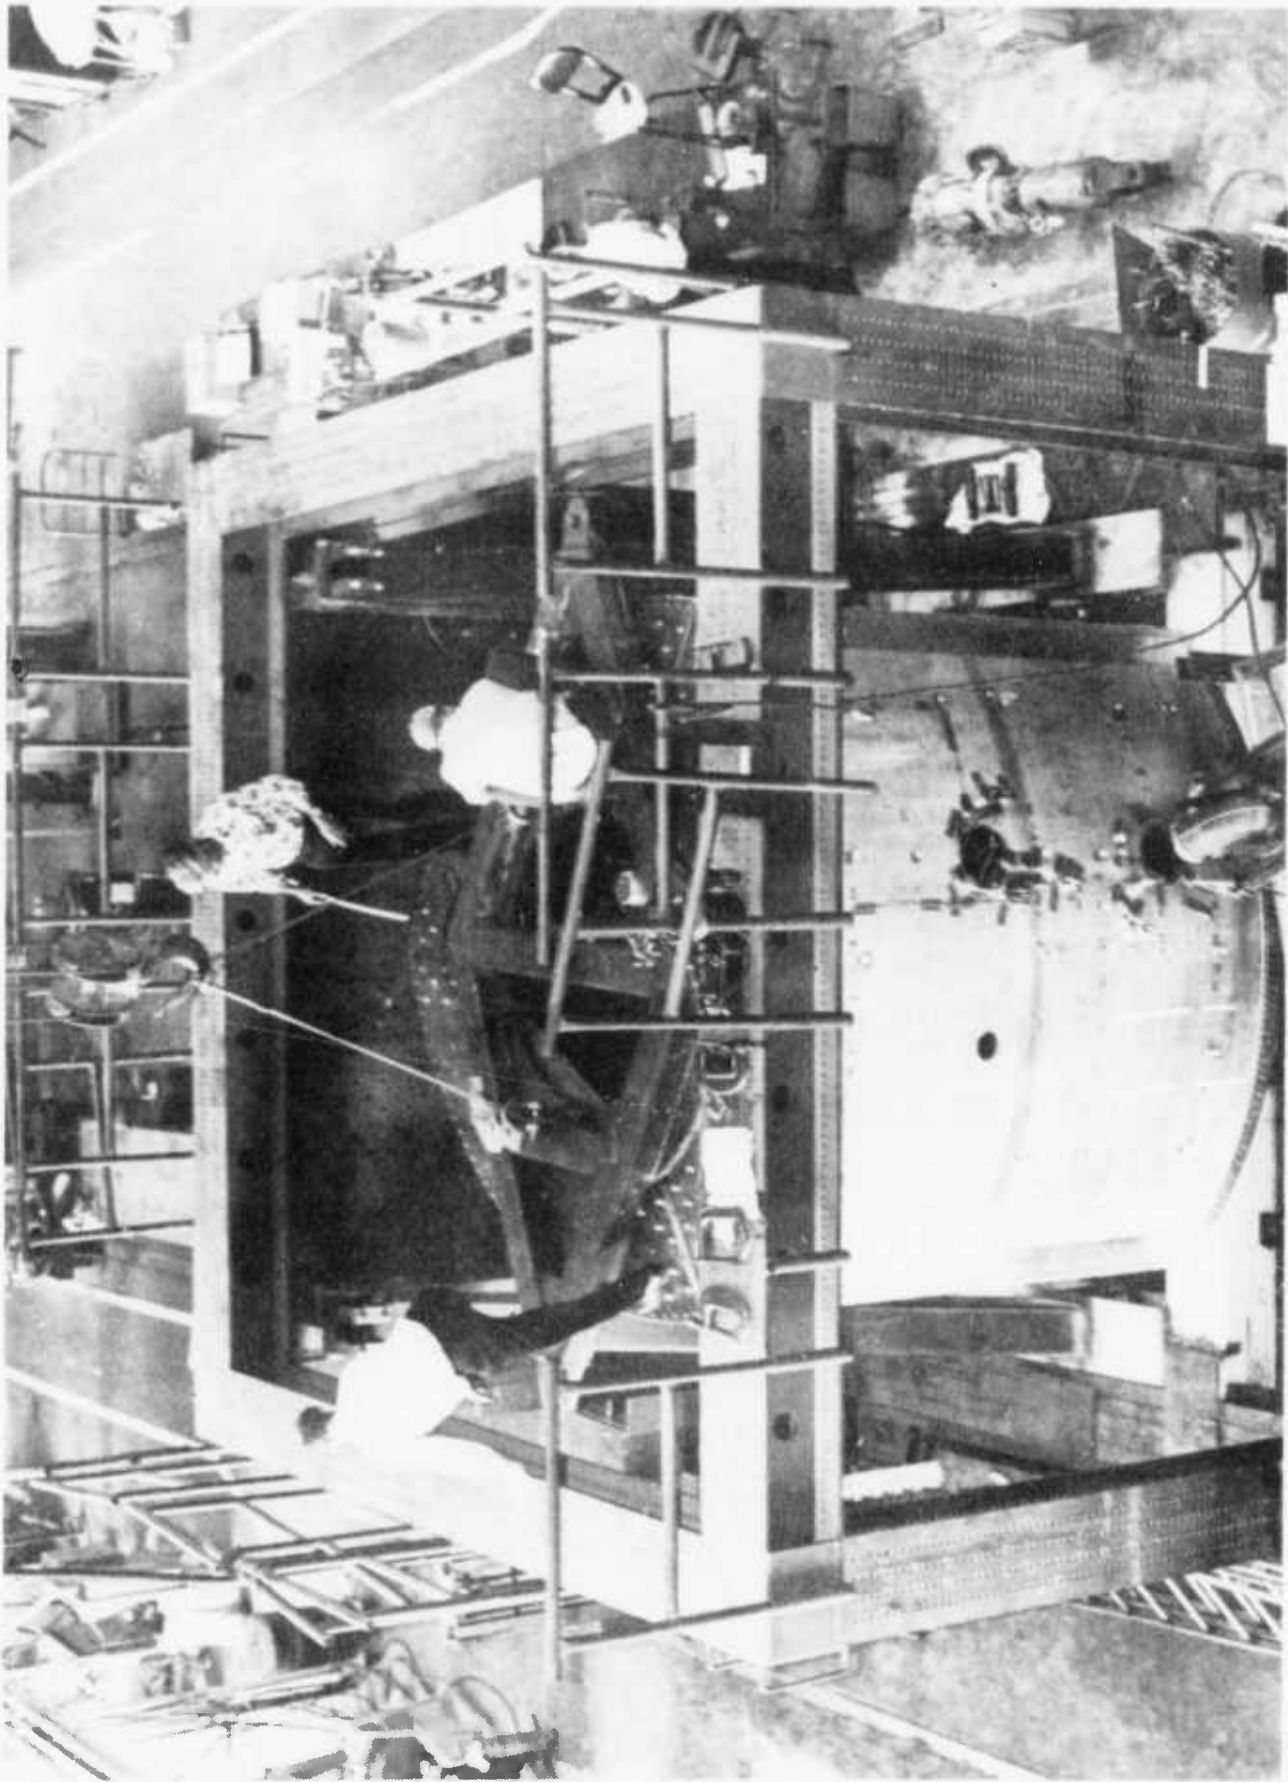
TORQUE LOADING ARM BEING INSTALLED
